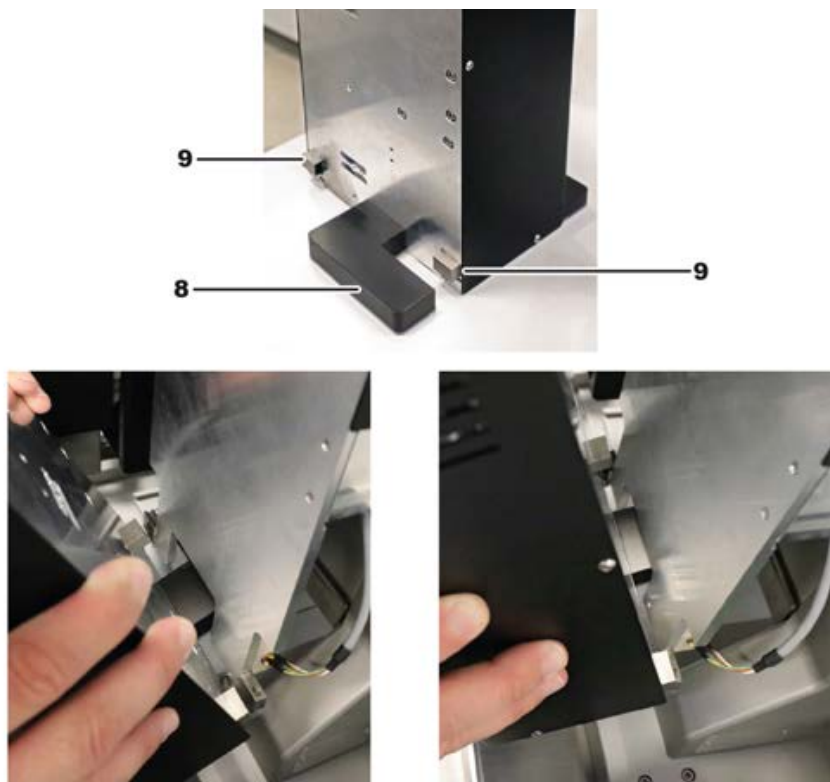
On the left side of the picture: Heating head holder and placer head holder. On the right side of the picture: Heating and placer heads fitted on the brackets.
